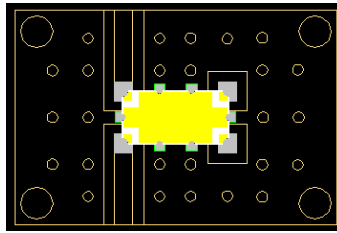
Placing the DL2 on the 11 Points of the PCB Surface
